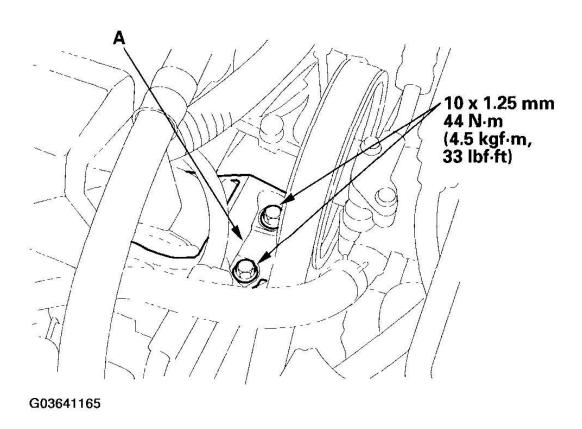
Installing 10 mm Flange Bolts On Engine Side Mount Bracket Courtesy of AMERICAN HONDA MOTOR CO., INC.
